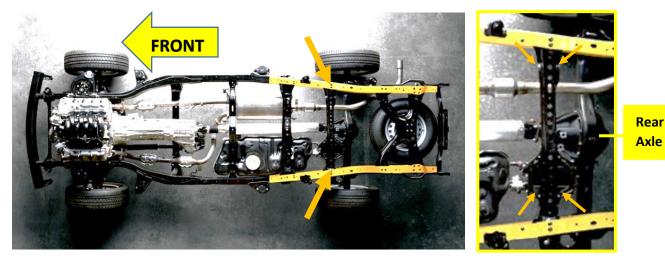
Frame Reference and Crossmember Location (2007 Tundra Frame Shown)
